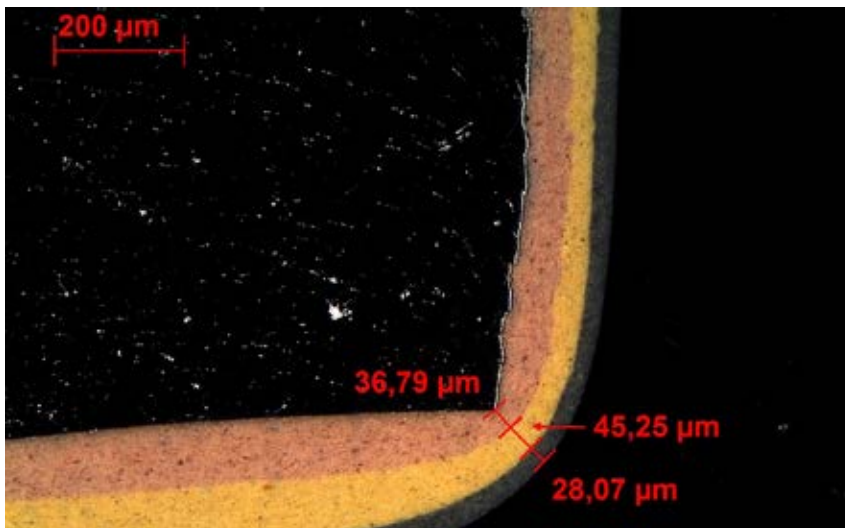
Reliable edge coverage on sharp edges can only be achieved by a multi-layer system.
